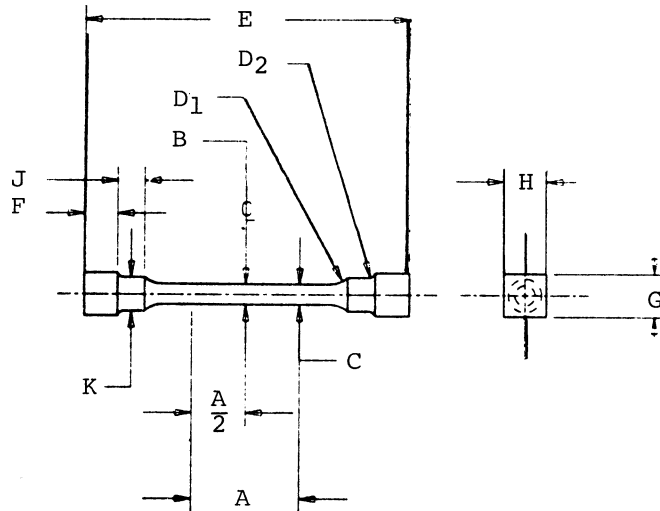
Standard Flat Unmachined Tension Test Specimen for Powder Metallurgy (P/M) Products
